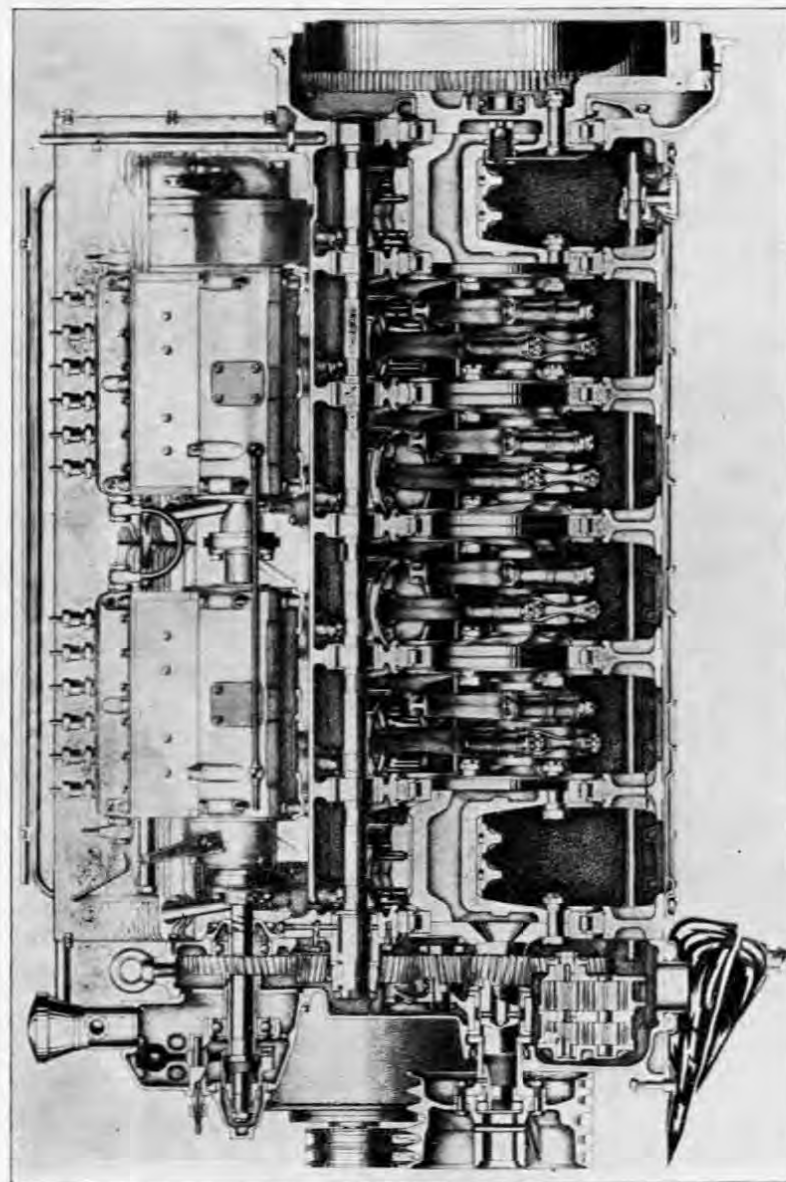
Longitudinal section of the Tatra 111 oil engine.
